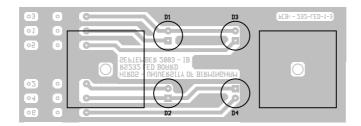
RS-232 LED Board component layout and bottom-side tracks.
